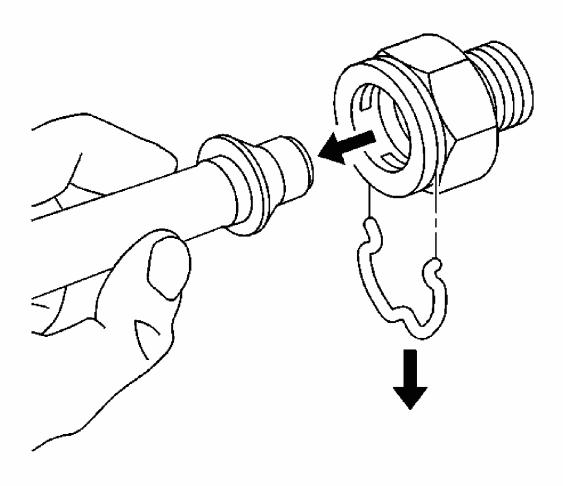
View of Engine Cooler Pipes & Fittings Courtesy of GENERAL MOTORS CORP.
